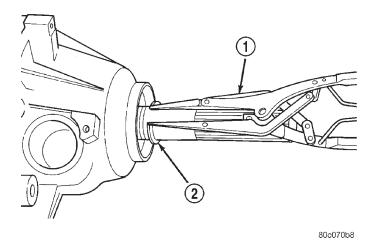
Output Shaft Rear Bearing Retaining Ring
